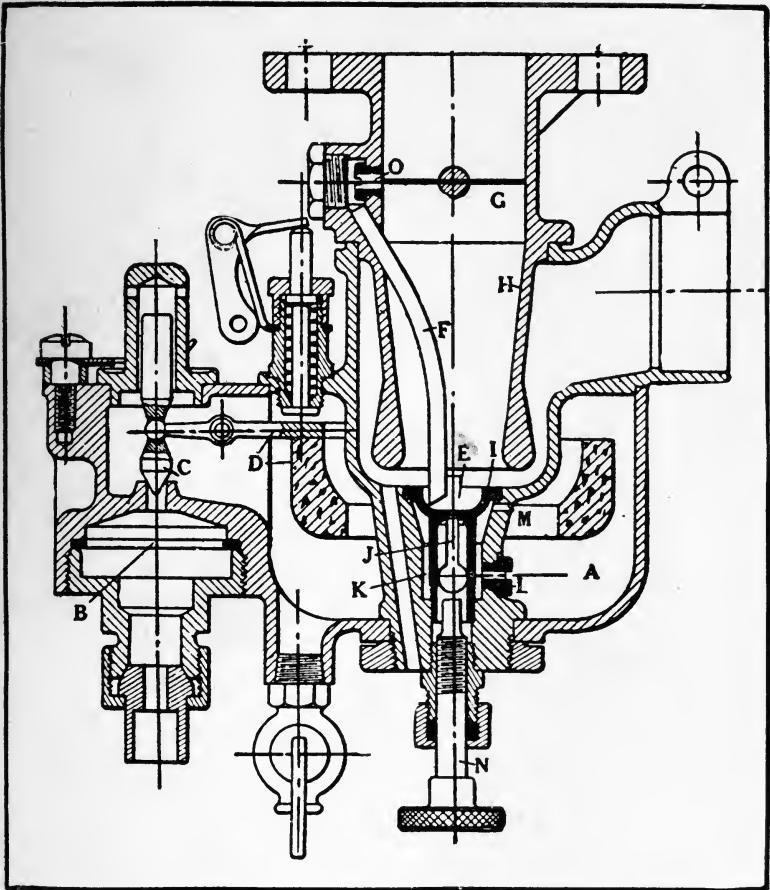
Latest Model of Holley Carburetor with By-pass Tube to Provide Easier Starting.
